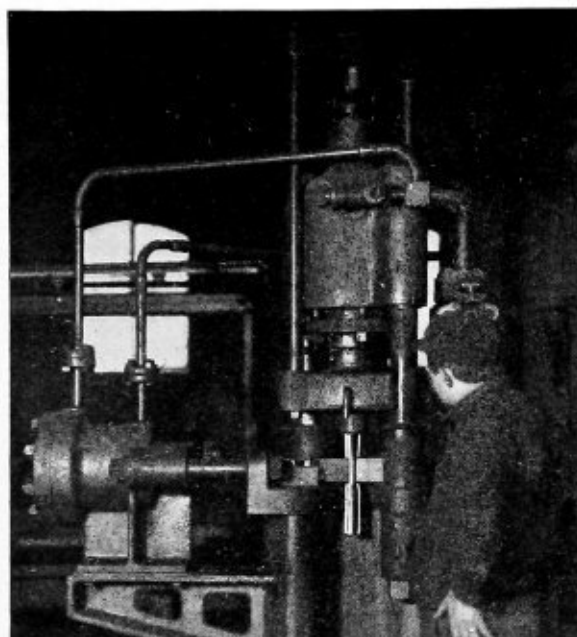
FLANGING MACHINE, SAMPLE OF TUBE AT FIRST STAGE OF TEST.
